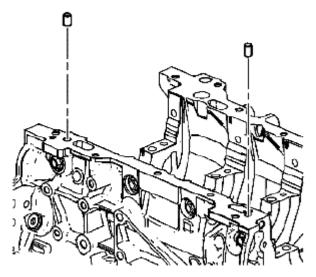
Identifying M14 Right Side Oil Gallery Threaded Plug Courtesy of SUZUKI OF AMERICA CORP.
